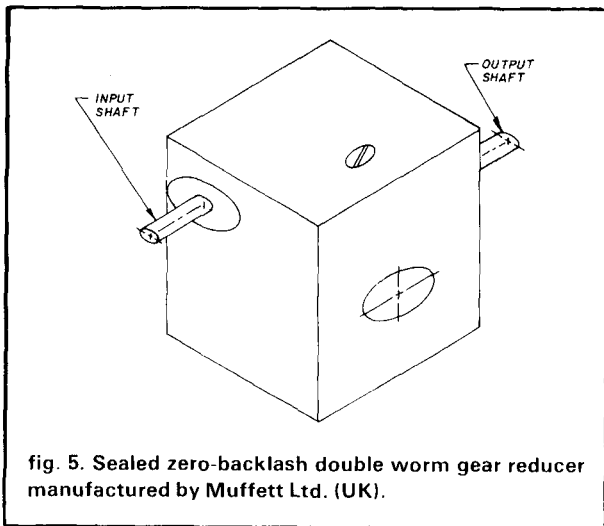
Sealed zero-backlash double worm gear reducer manufactured by Muffett Ltd. (UK).
